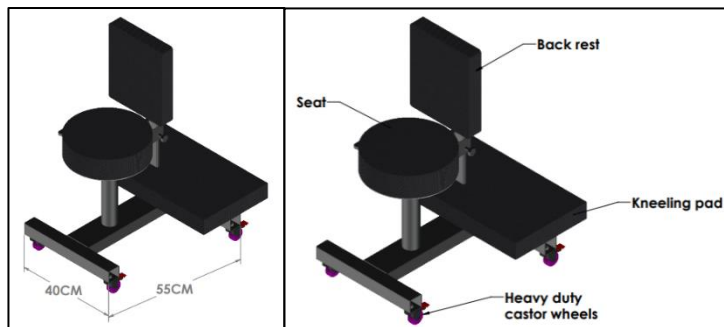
A prototype (a) dimensions and (b) its components of the hot work chair
